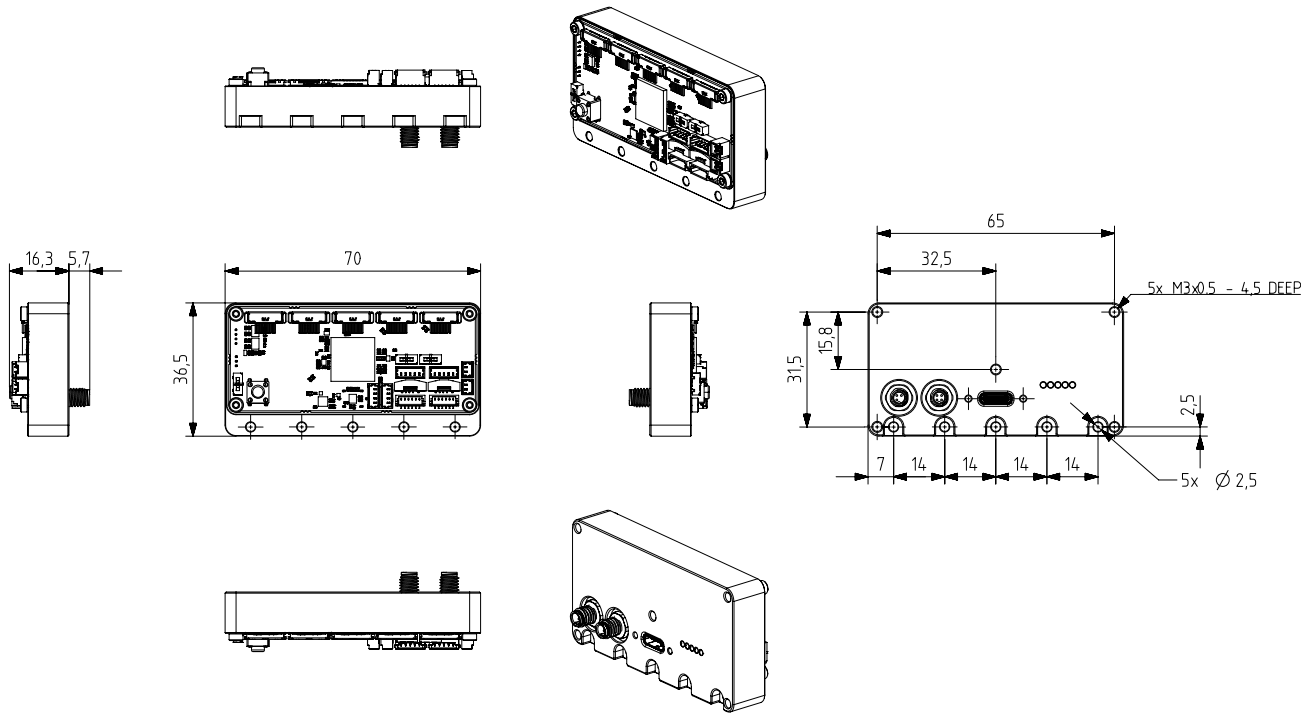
Dimensional drawing of XS-5P-U3-UC-TC
